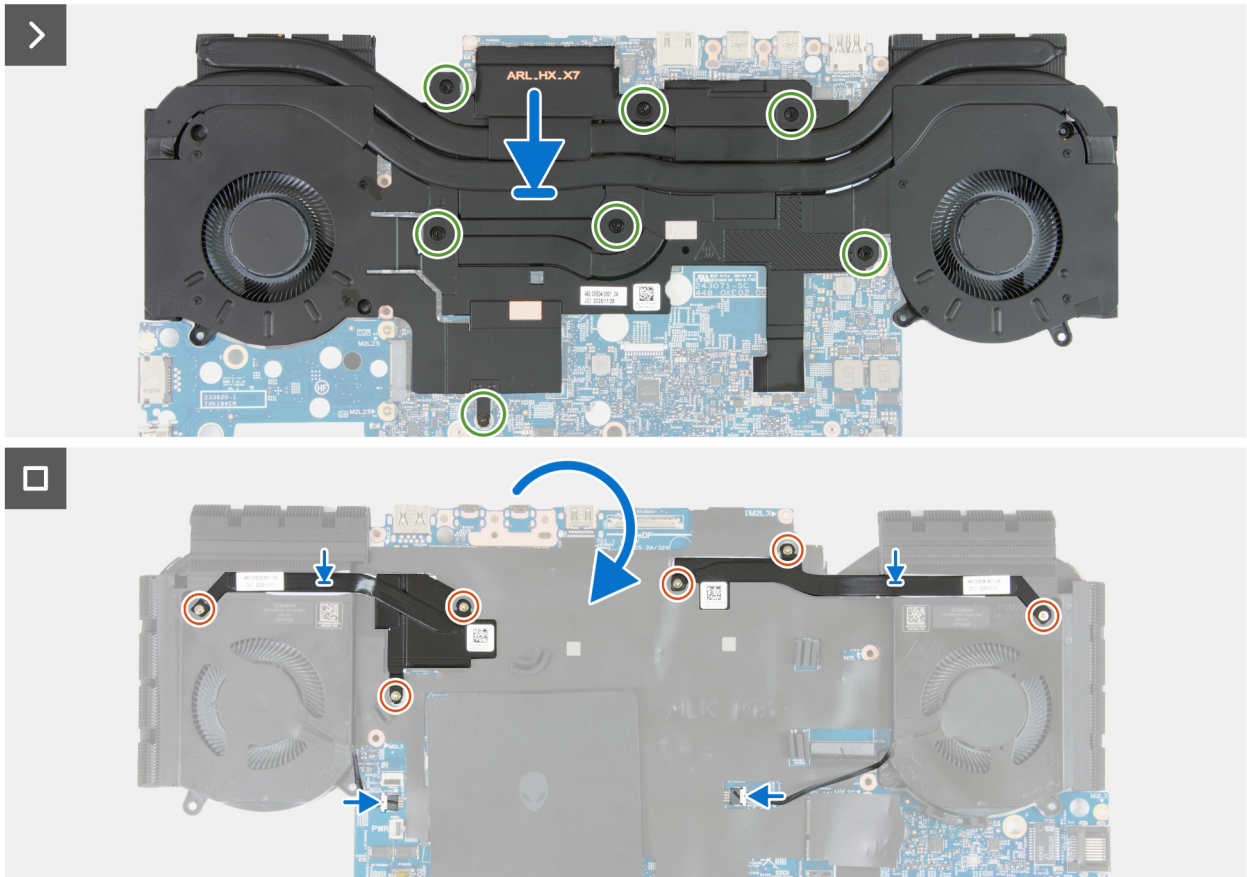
Installing the fan and heat-sink assembly (for computers with VR heat sinks)
